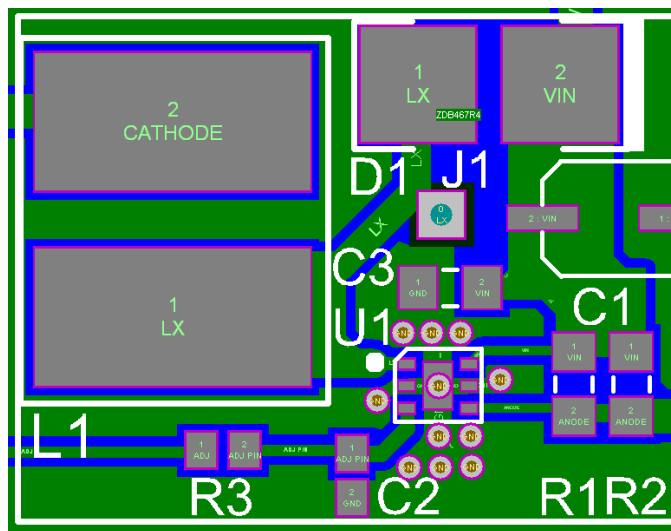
Suggested Layout for V-DFN3030-6 Package
